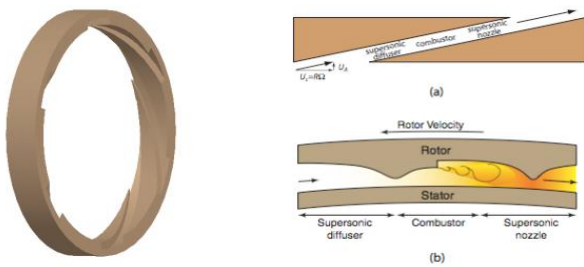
Rim Rotor Assembly and helical Ramjet Channels of R4E [4]
